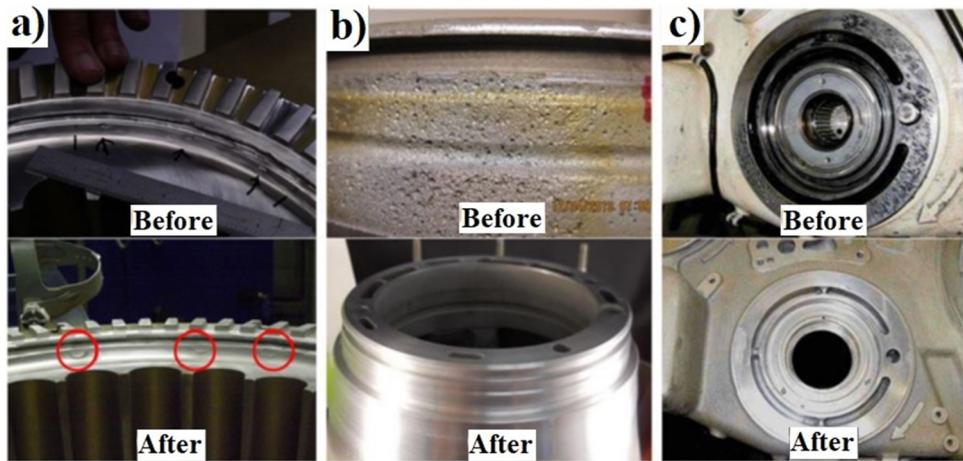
Comparing the deteriorated and restored parts by CSAM: (a) AH-64 helicopter mast support, (b) F18-AMAD gearbox, and (c) front frame of T-700 engine [70].
